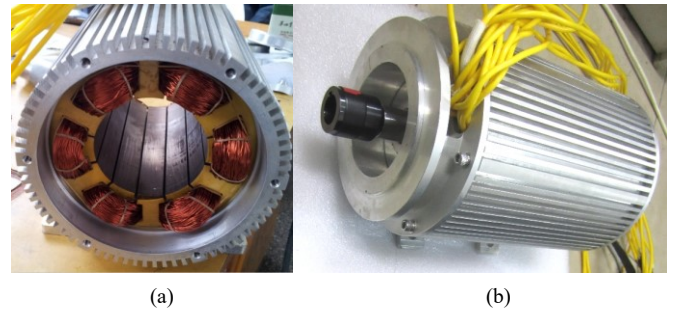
DWFT-PMM prototype. (a) Internal stator structure, (b) Prototype appearance design.
